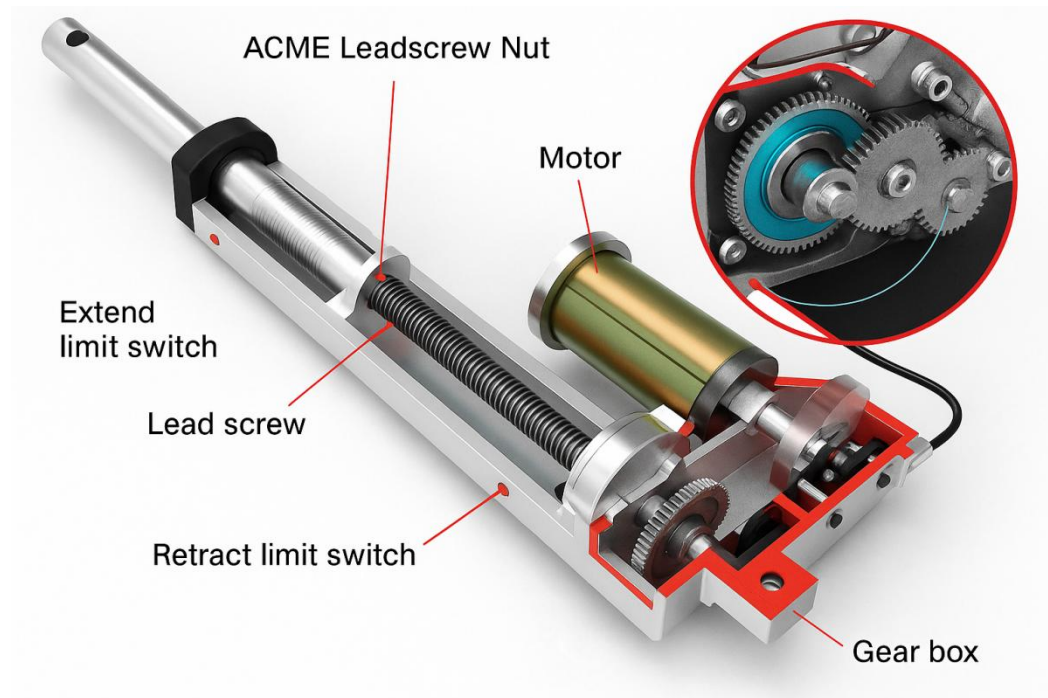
Cutaway view of an electric linear actuator showing key components: ACME leadscrew nut, lead screw, extend and retract limit switches, motor, gear box, and detailed gear arrangement (inset), illustrating the conversion of rotary motion from the motor to precise linear motion for actuation [19].
